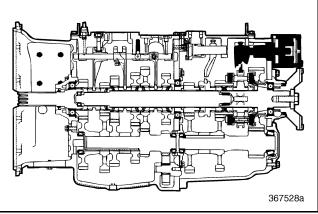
Range Shift Cylinder Locator (T313L/T318L Shown)
